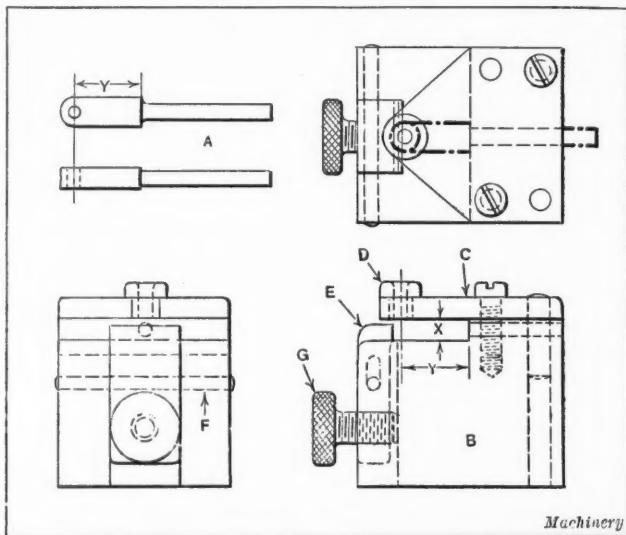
Jig designed for Use in drilling the 1/8-inch Hole in Part A
